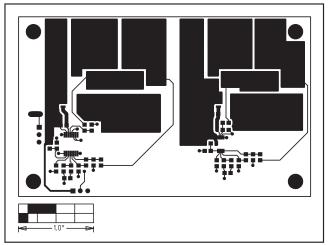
MAX1846 EV Kit PCB Layout—Component Side
